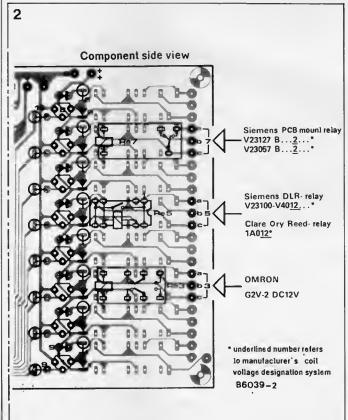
Showing how different types of PCB-mount relays may be fitted onto the board.
